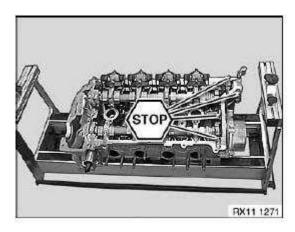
Identifying Camshaft Stop Courtesy of BMW OF NORTH AMERICA, INC.
